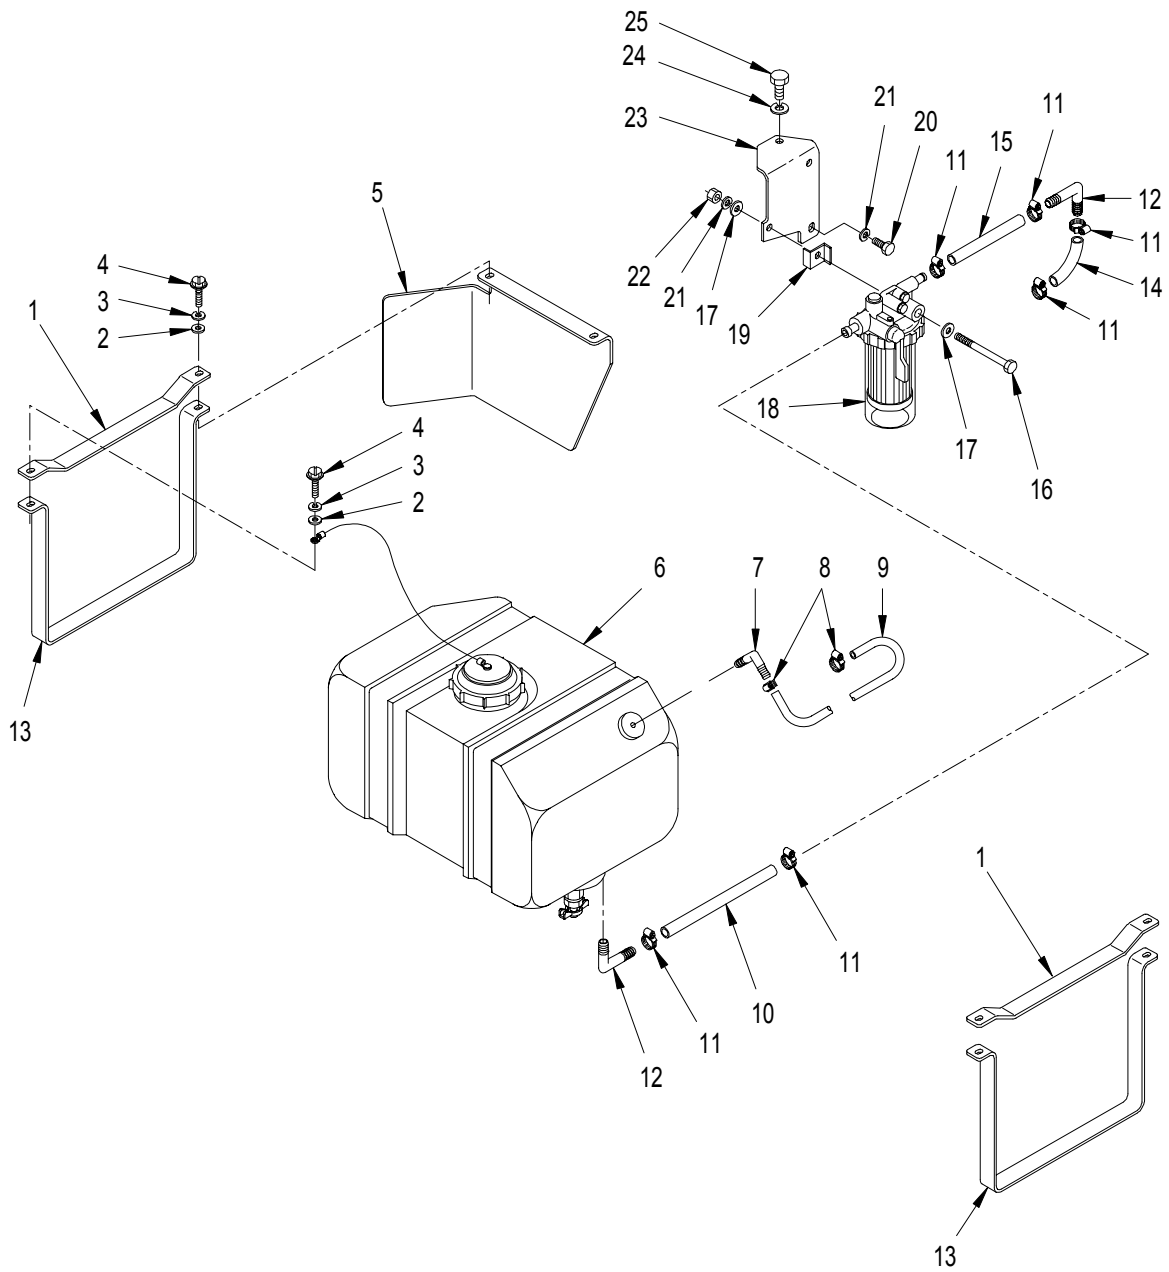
Fuel System Assembly (MEP-531A/501A)
